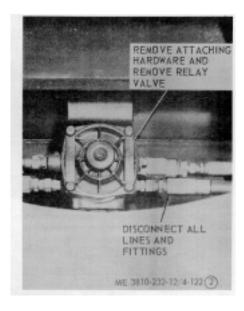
Relay valves, removal and installation. Sheet 2 of 2.
